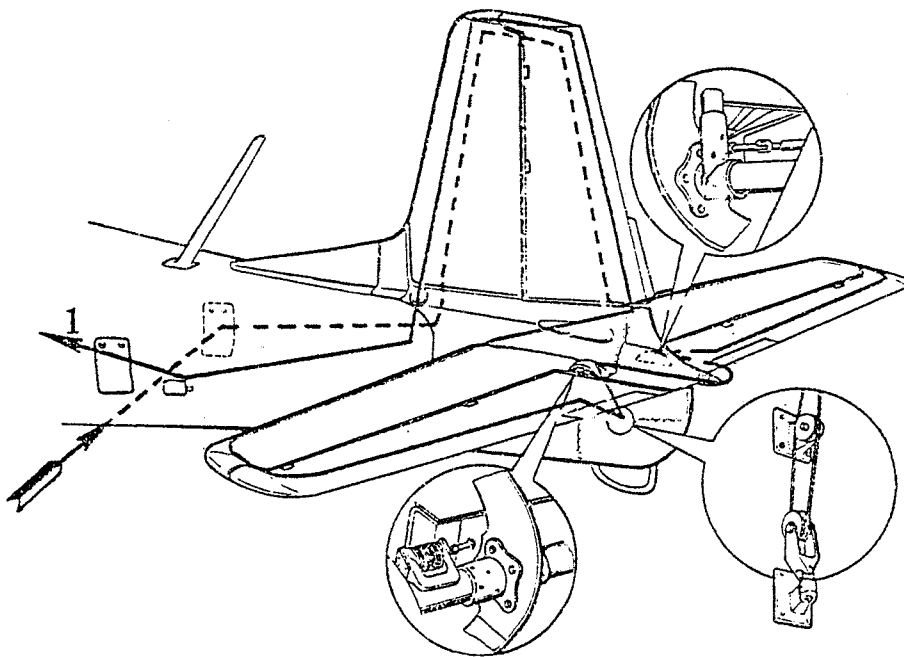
Inspection Circuit for the Fuselage and Empennage
